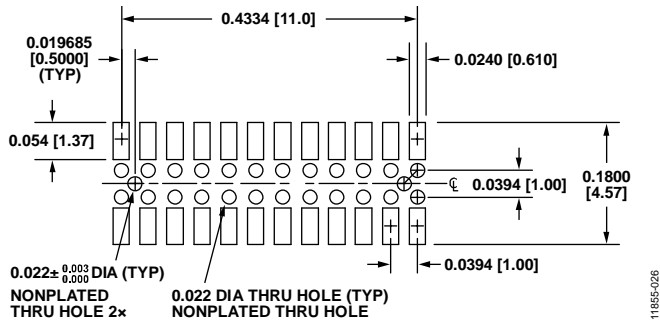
Suggested Layout and Mechanical Design When Using Samtec P/N CLM-112-02-G-D-A for the Mating Connector
